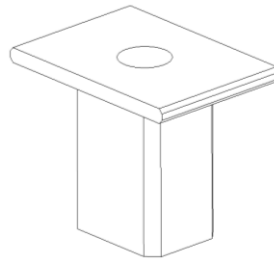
A: MOUNTING FIXTURE EXAMPLE
